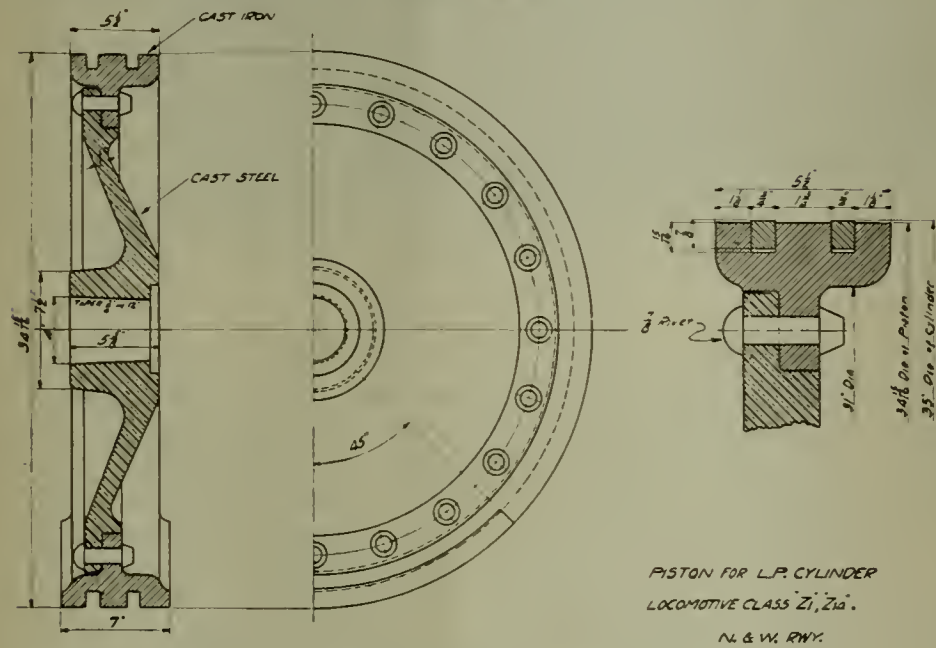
Customary Practice of Riveting Cast Iron Bull Ring to a Steel Center.
